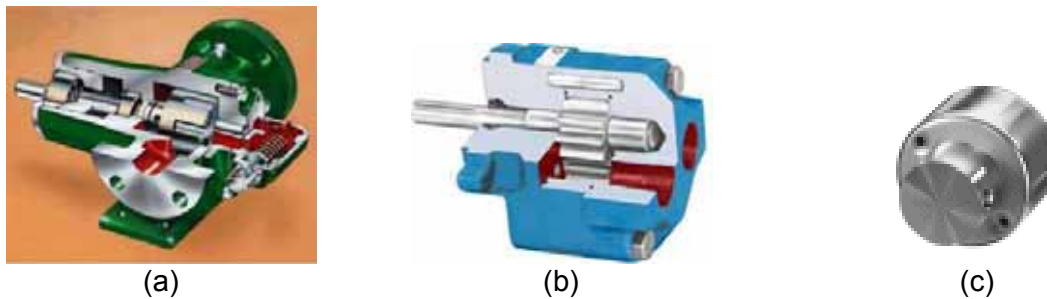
Gear pump technologies. (a) Internal gear pump, (b) external gear pump, (c) micro-pump.
